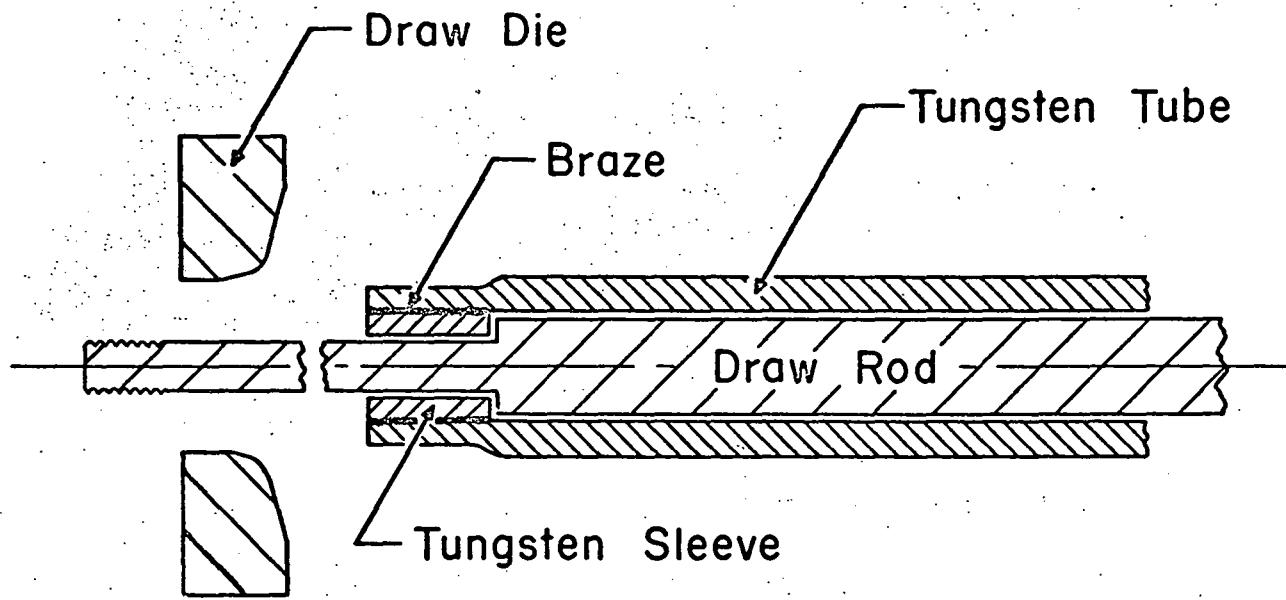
Technique Used for Drawing of Tungsten Tubing
